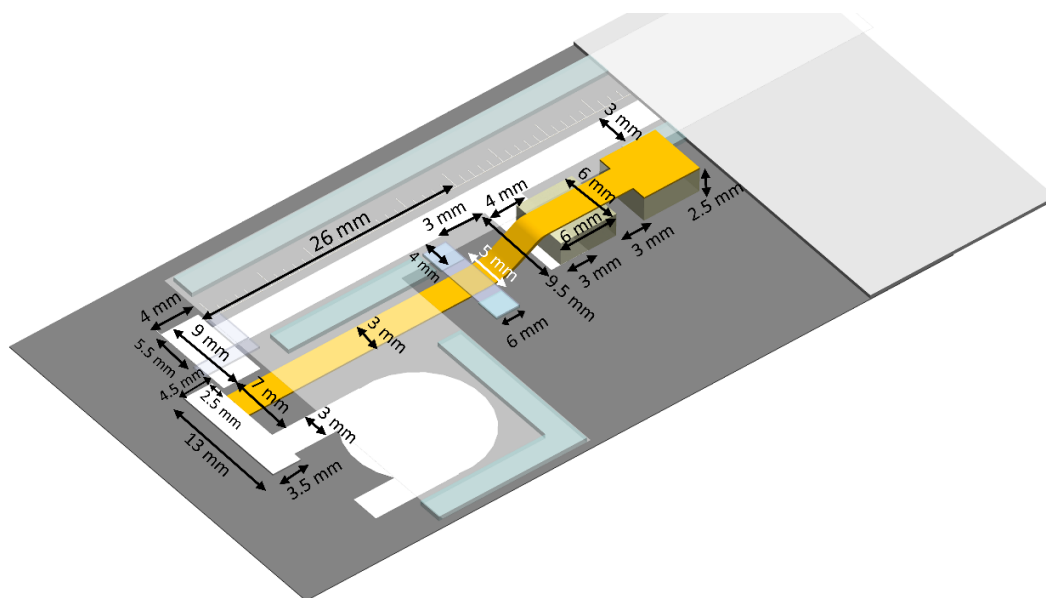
Dimensions and positions of components when making the μ PAD with a horizontal motion mechanical valve.
